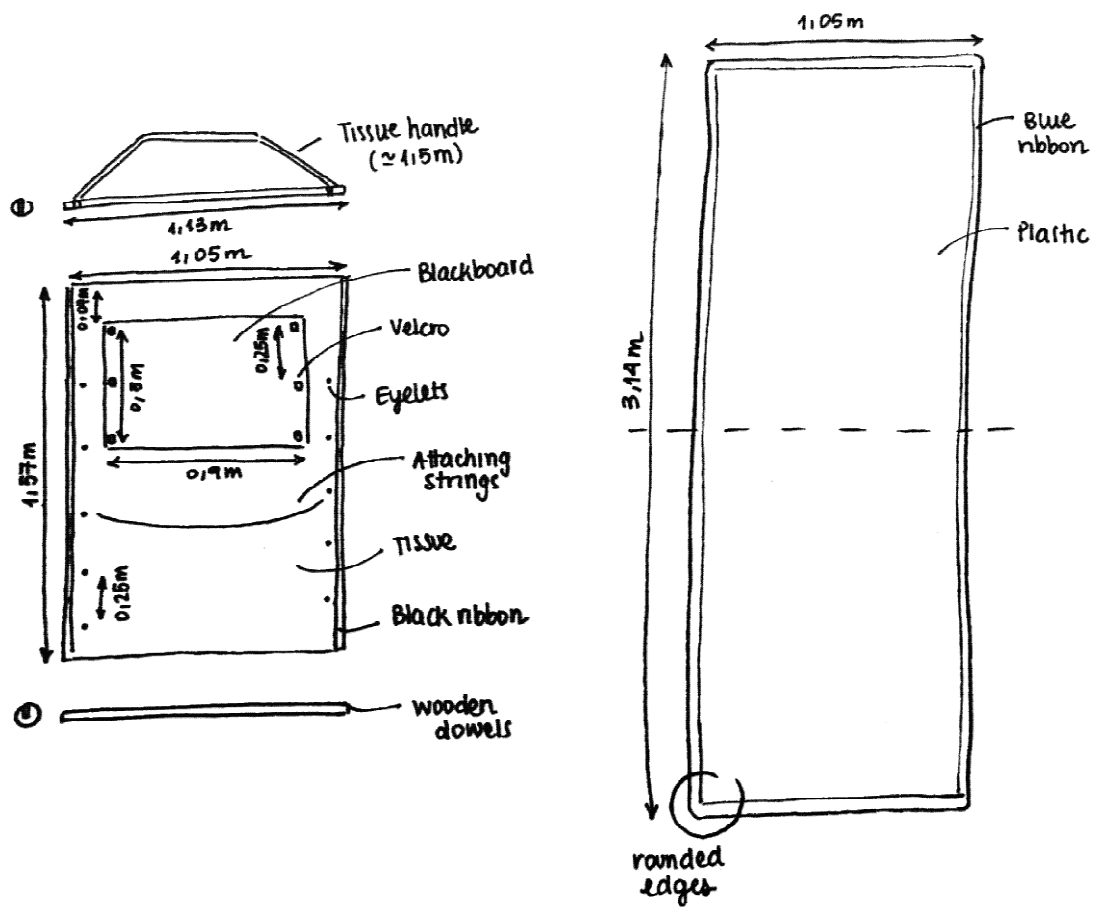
Sketch of dimensions of the first prototype<sup>1</sup>
